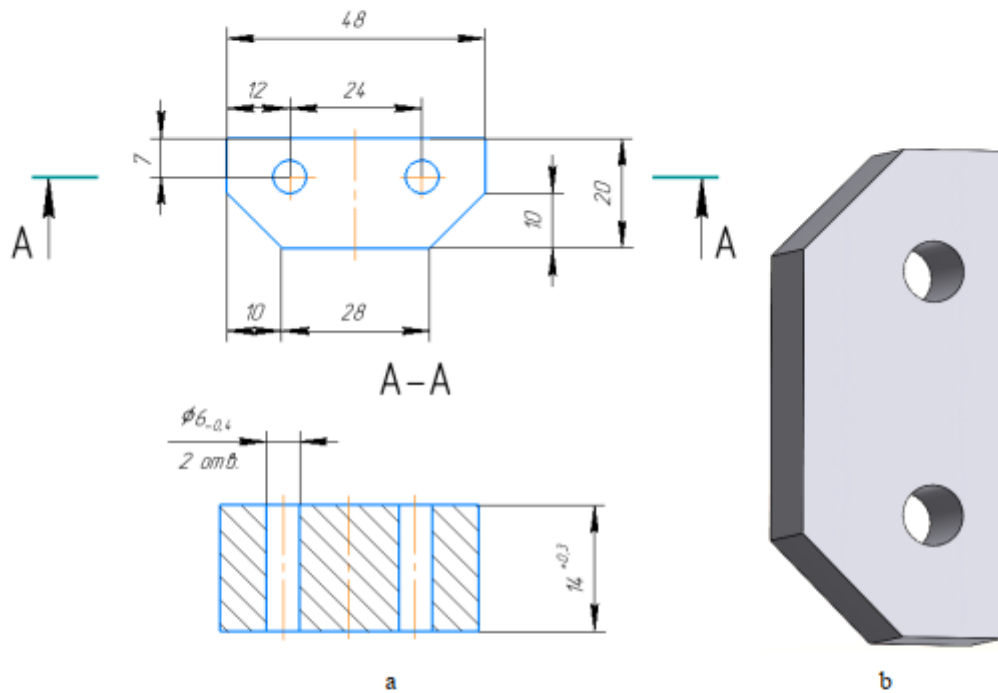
A drawing of a clamp motionless (a) and its 3D model (b)
